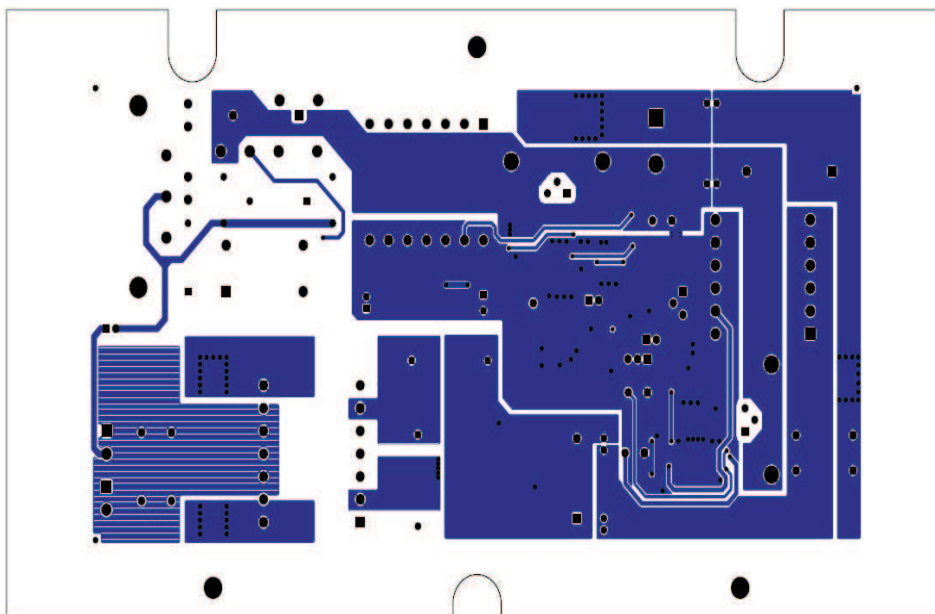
Isolated 240-W LED Driver PCB (bottom view)
